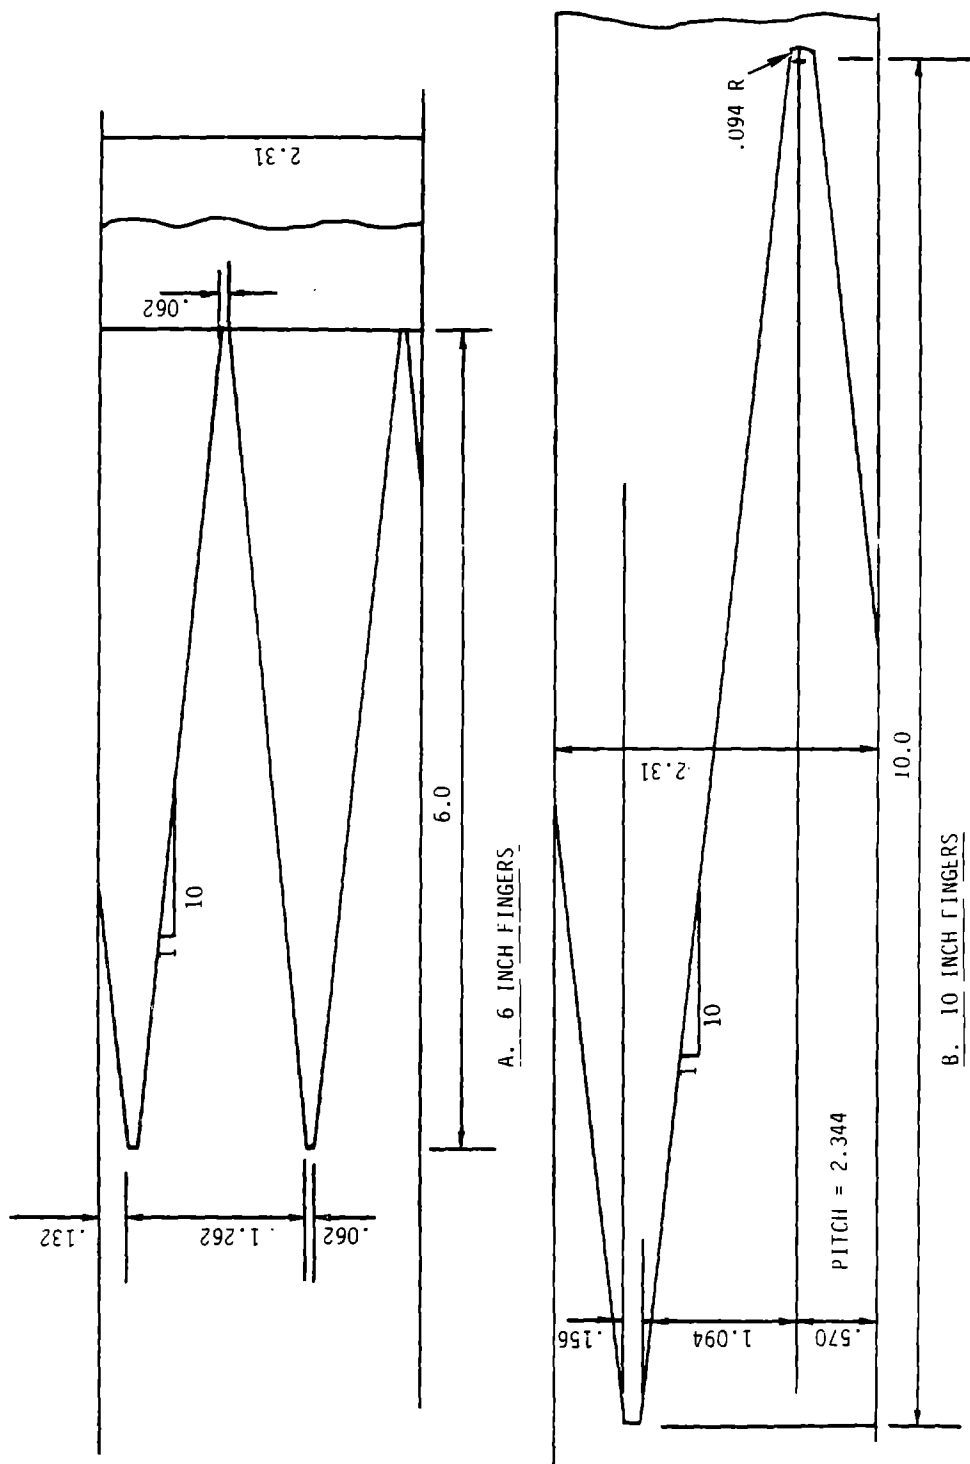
Detail of Machined Fingers, Aged Tensile Test Specimens
